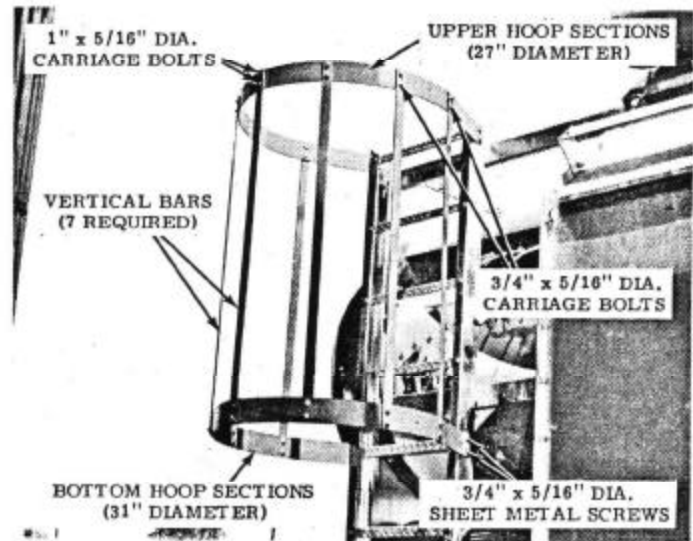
FRONT SAFETY CAGE INSTALLED
